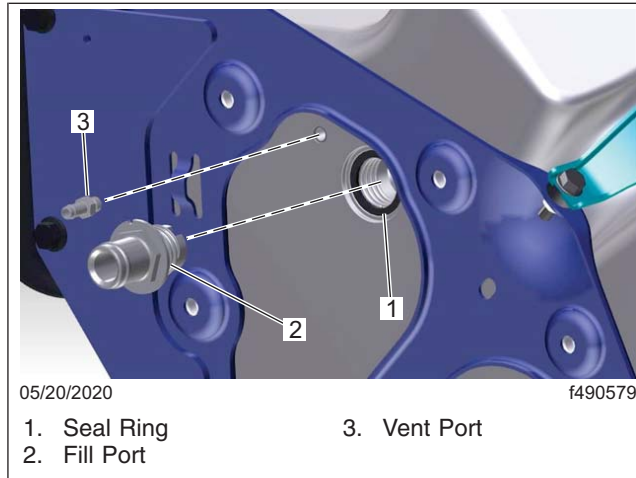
, Positioning the Seal Ring in the Seal Groove on the DEF Tank
